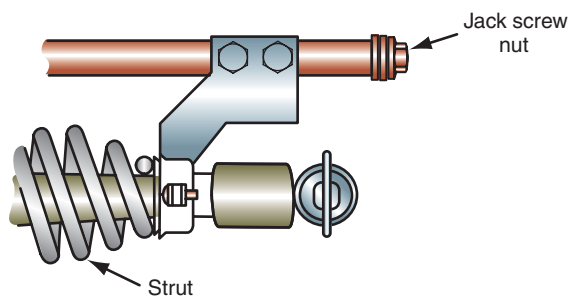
Component identification in short-and-long arm suspension with the coil spring mounted on the shock absorber.
